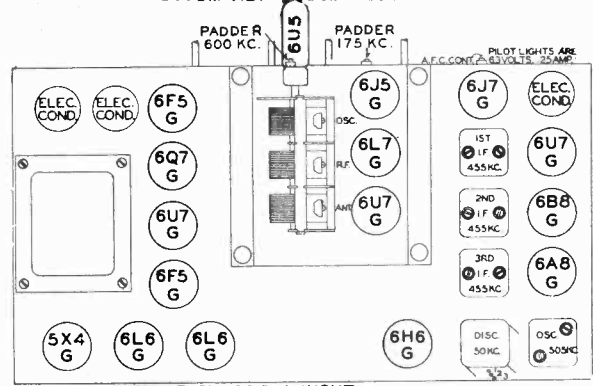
B CHASSIS LAYOUT (TOP VIEW)
